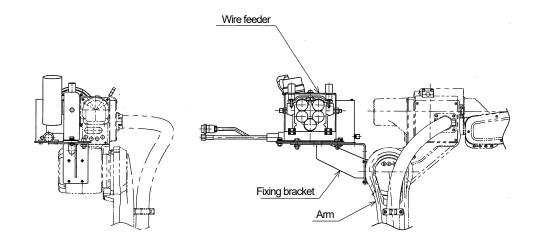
Outline view of mounting wire feeder (Procedure 3)
